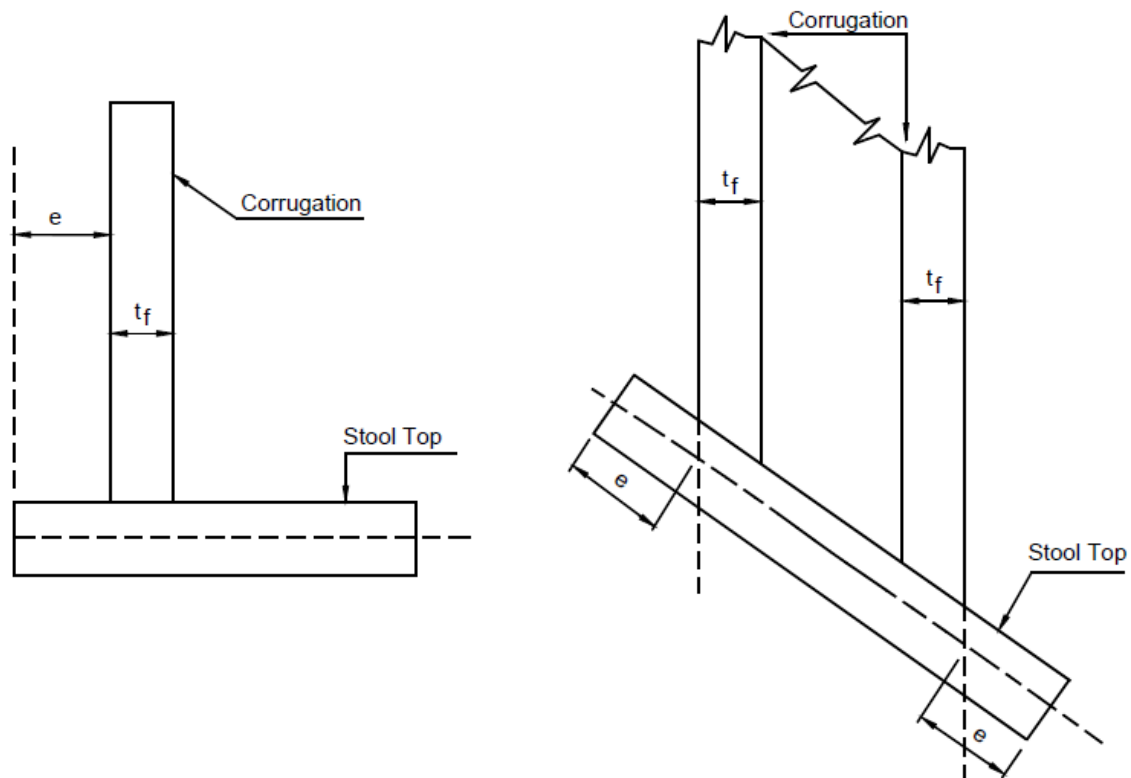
Permitted distance, e , from edge of stool top plate to surface of corrugation flange
